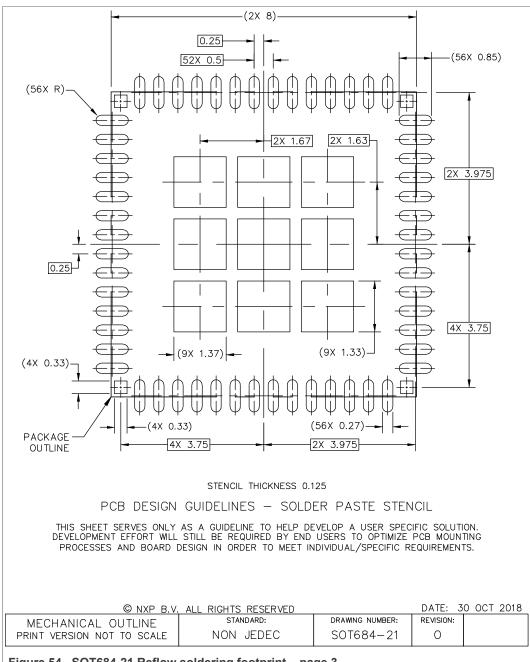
SOT684-21 Reflow soldering footprint – page 3
